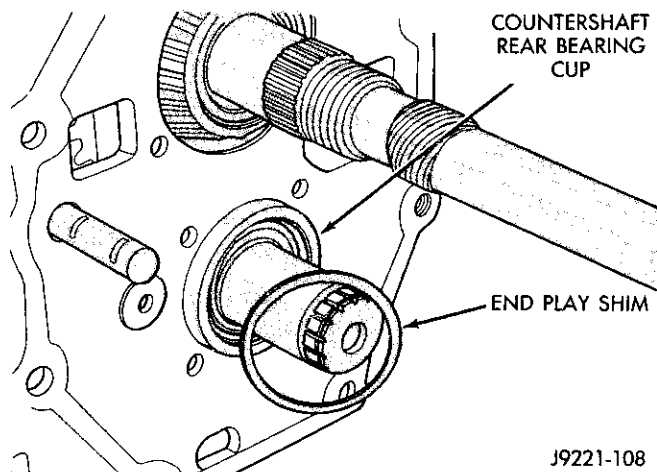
Countershaft End Play Shim And Rear Bearing Cup Removal
